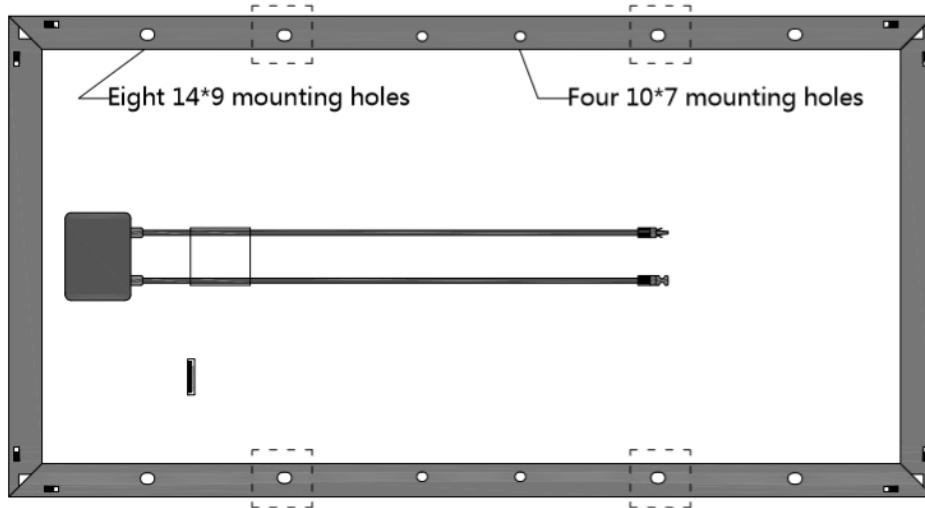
PV module installed with bolt fitting method (four mounting holes)
